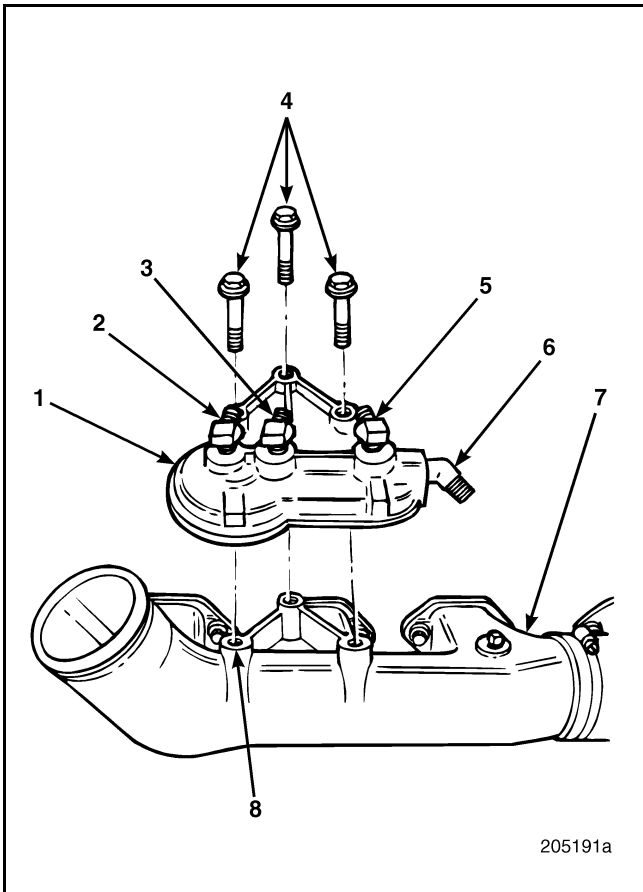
Fuel Filter Adapter Assembly (Early Production)
